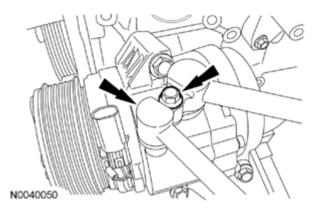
Locating A/C Manifold Tube And Bolt Courtesy of FORD MOTOR CO.
